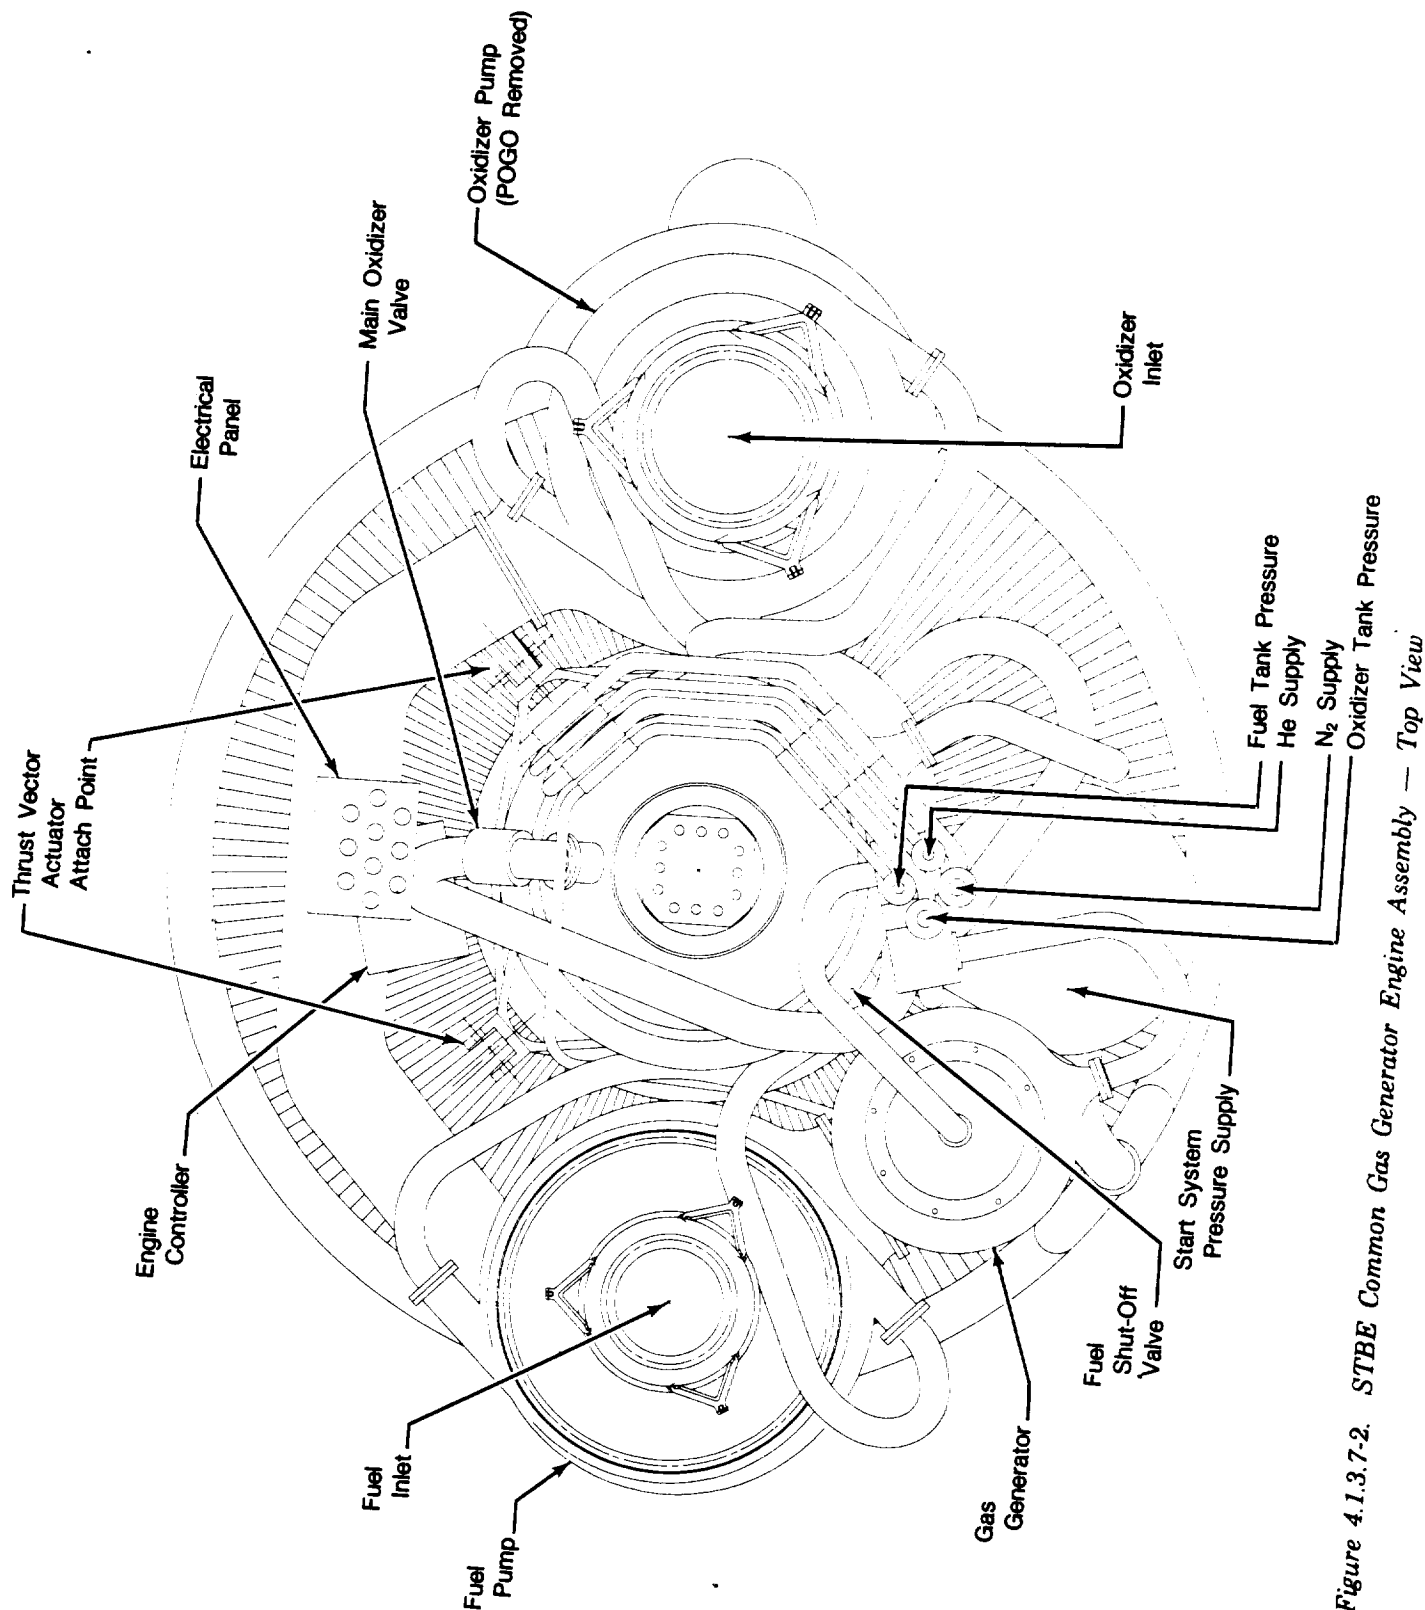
STBE Common Gas Generator Engine Assembly — Top View
